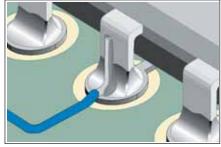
Acceptable Wire soldered parallel to lead on component side.
